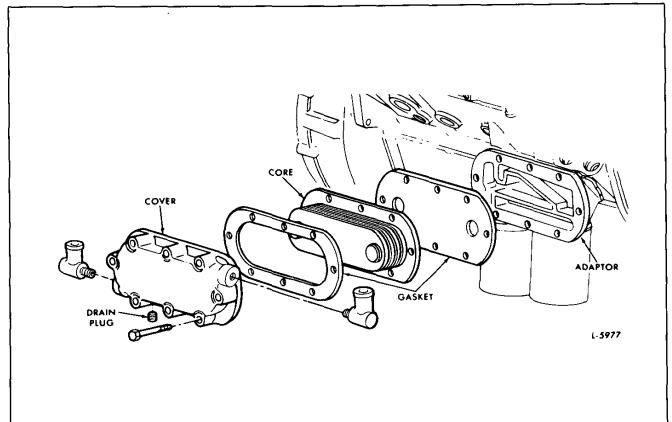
Typical Engine Oil Cooler (Except Marine)
